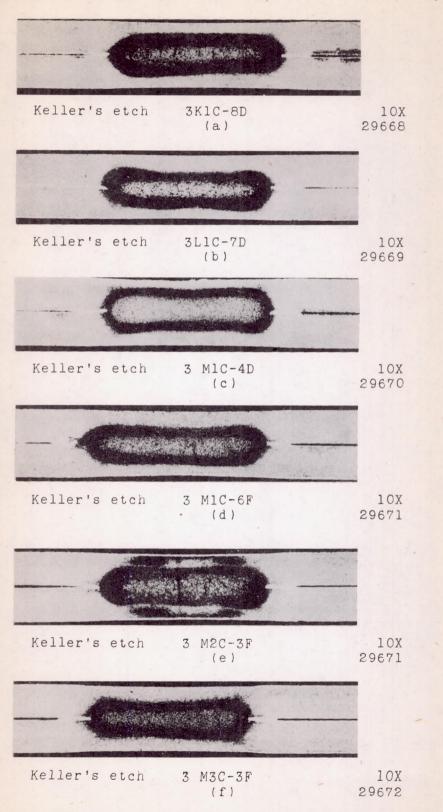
Representative welds from spot pattern specimens (0.040")
